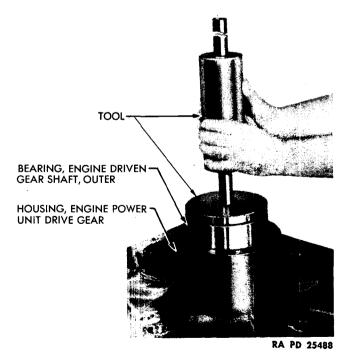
Installing Engine Driven Gear Shaft Outer Bearing
